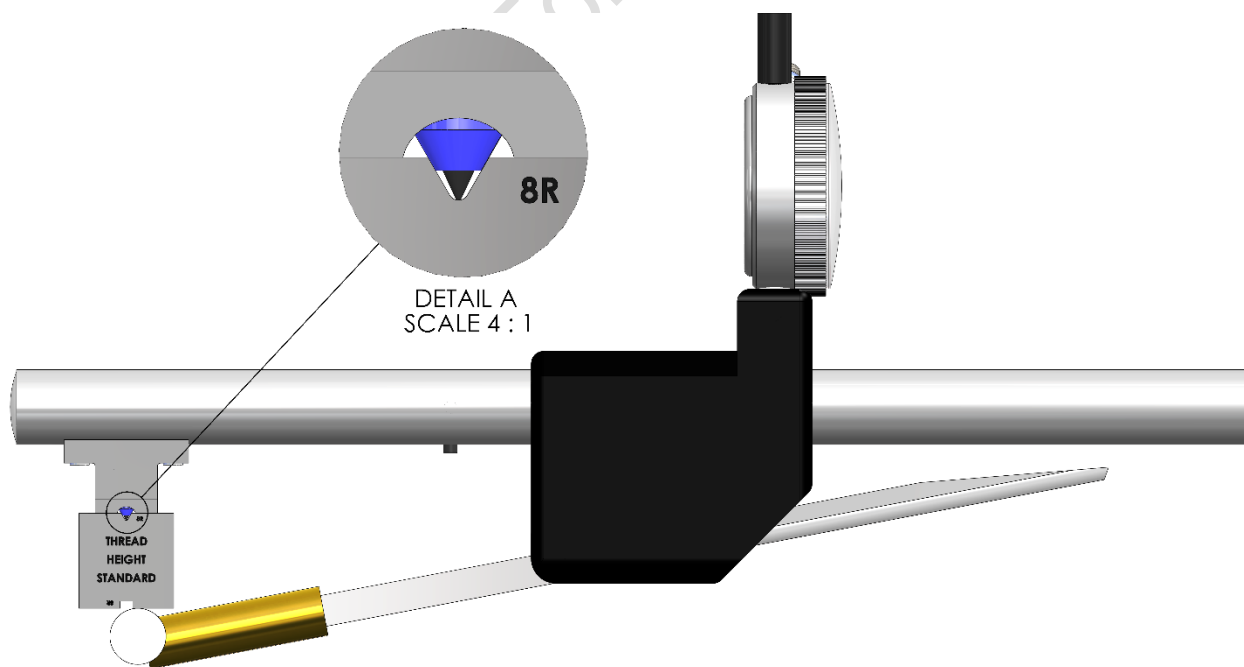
Internal Thread Height Gauge on Setting Standards (8R and 10R Thread Height Gauge on Block)
